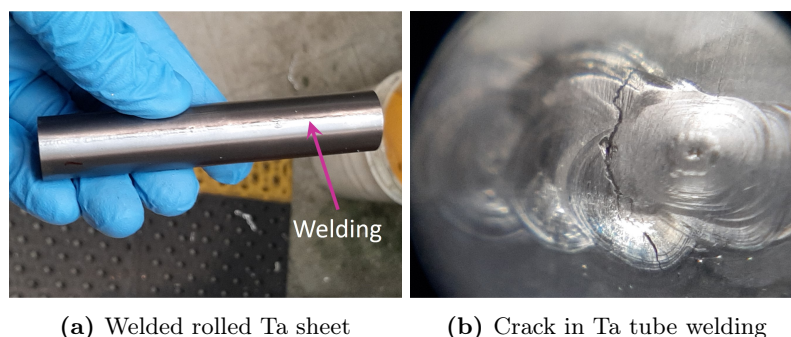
Cold-rolled tantalum tubes for testing. Cold-rolled tantalum sheets of 0.38 mm thickness were curled to tubes (19.1 mm O.D., 10 cm length) and welded (a); the welding presented microfractures (Mag. 30x) (b).
